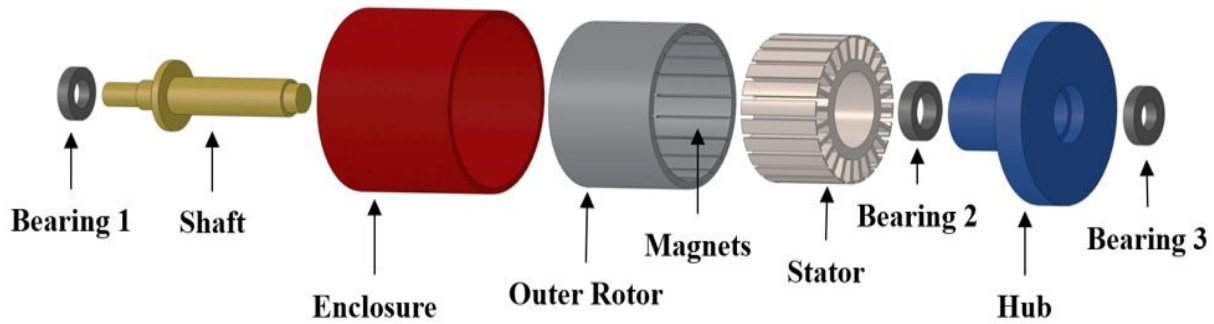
1. Outer Rotor Configuration (Assembly drawing)
